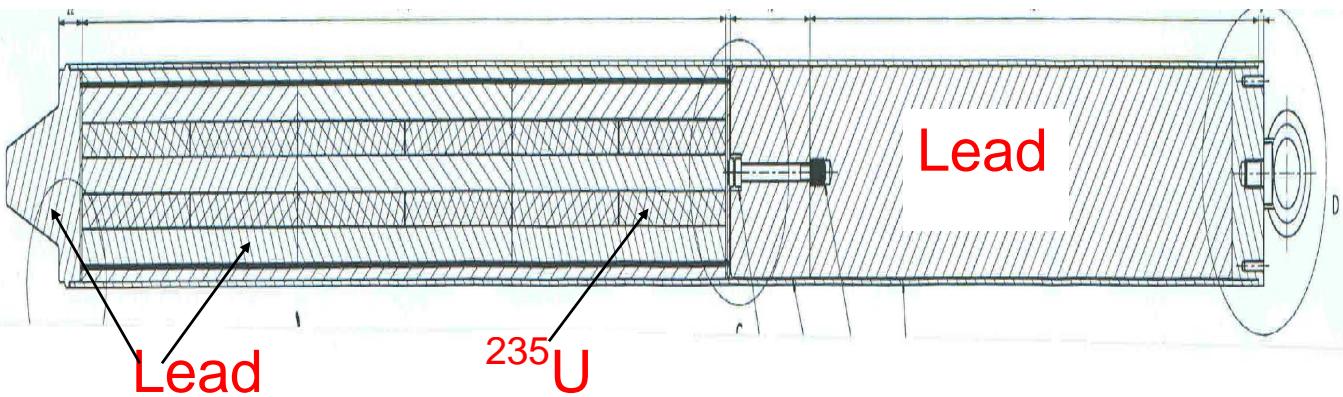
Longitudinal view of a Guinevere fuel assembly
